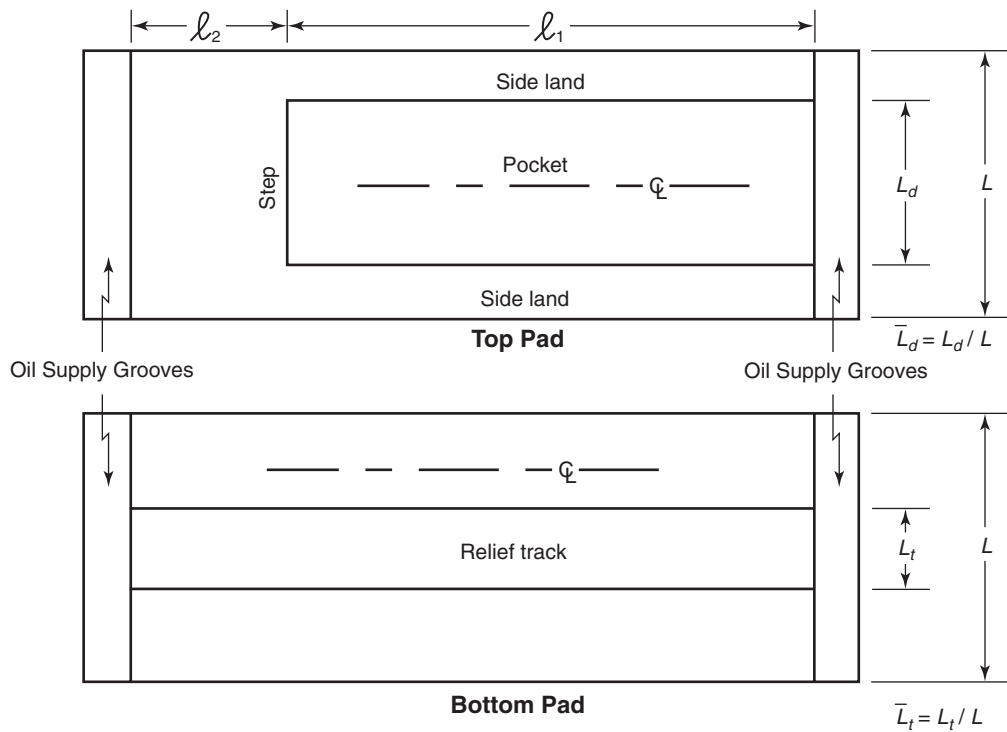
Pressure Dam Bearing—Top and Bottom Pads
